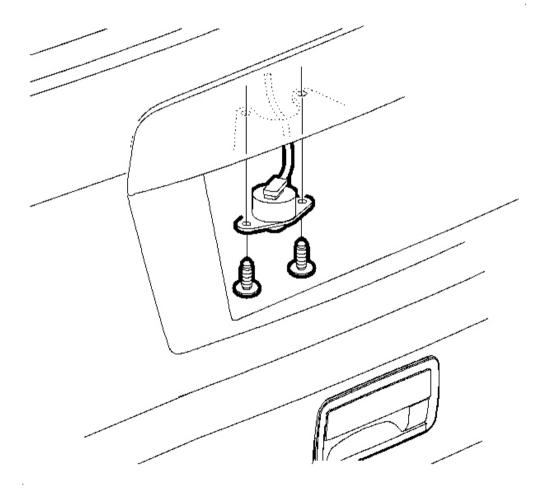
View Of License Plate Lamp Bulb Courtesy of GENERAL MOTORS CORP.
